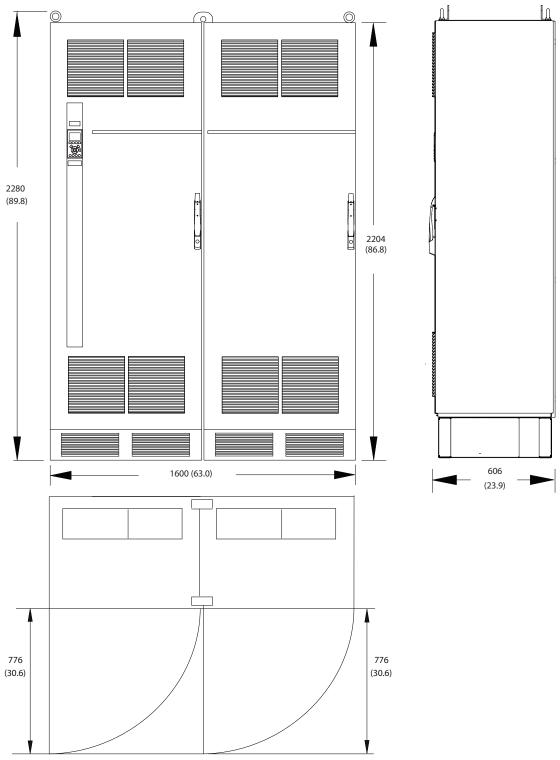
Front, Side, and Door Clearance Dimensions for F10
